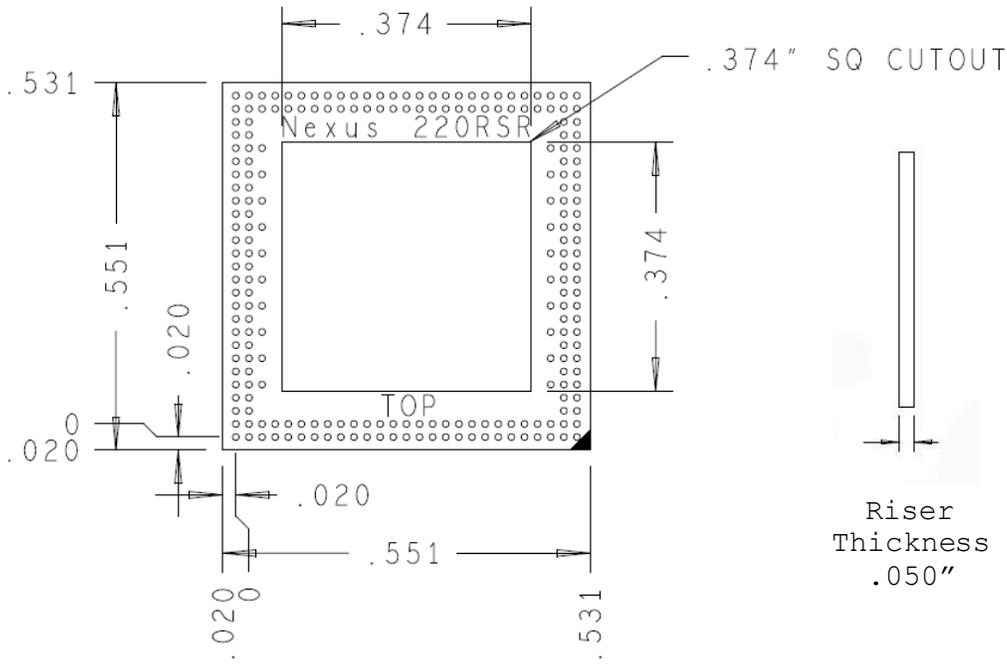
LPDDR2/LPDDR3-220 ball Riser Dimensions
